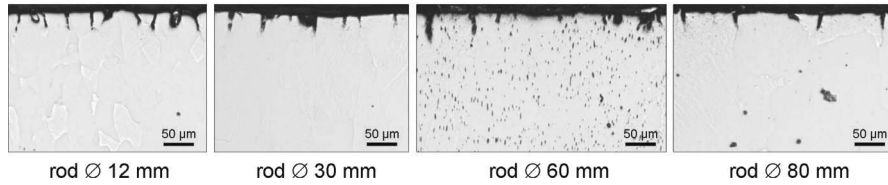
Optical micrographs of the cross sections of the as-machined surfaces showing the orientation of the cracks, mainly perpendicular to the machined surfaces.
